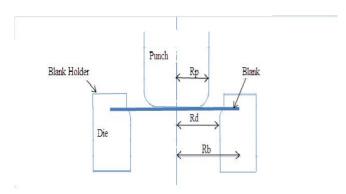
Tool geometry parameter of deep drawing process [4].
